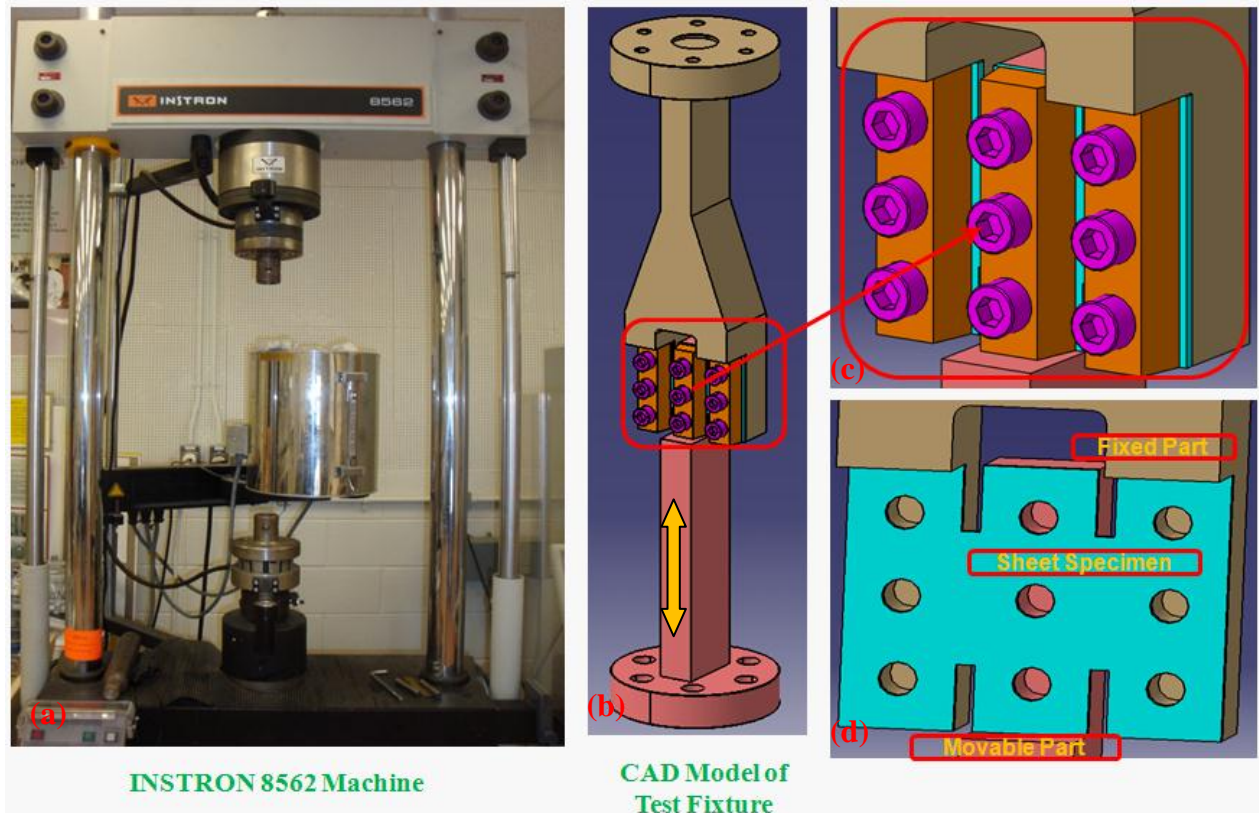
Photograph of (a) the INSTRON 8562 universal testing machine, (b) a CAD model of the cyclic shear test fixture, and (c) the details of holding blocks and bolts (d) the sheet specimen positioned in the testing fixture
